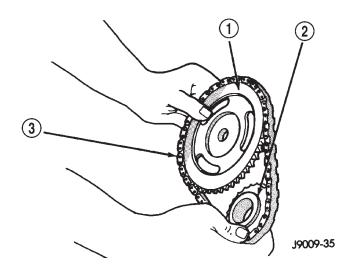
Camshaft and Crankshaft Sprocket and Chain
